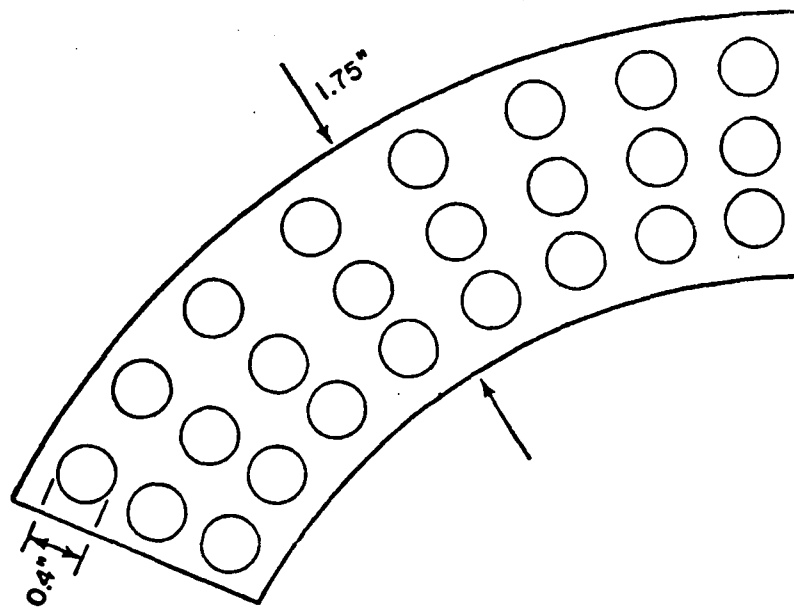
Incoloy 901 Shaft Forging Segment Indicating Cut-Out Pattern for LCF Test Specimens
